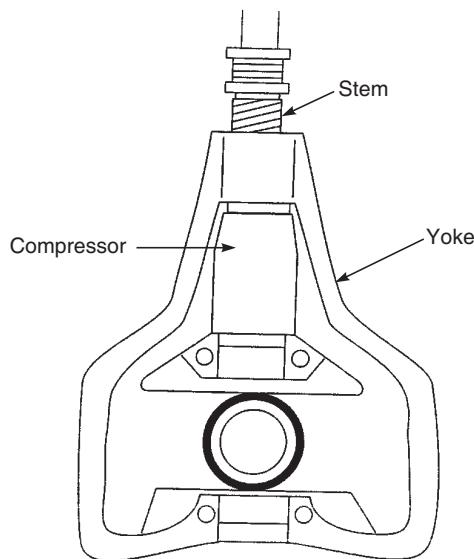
Mechanically clamped pinch valve [Courtesy—Resistoflex Corp.].
